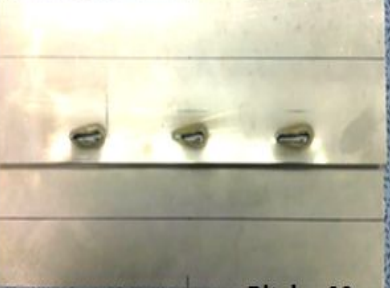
Specimen geometry for Laser Stitch Welding
